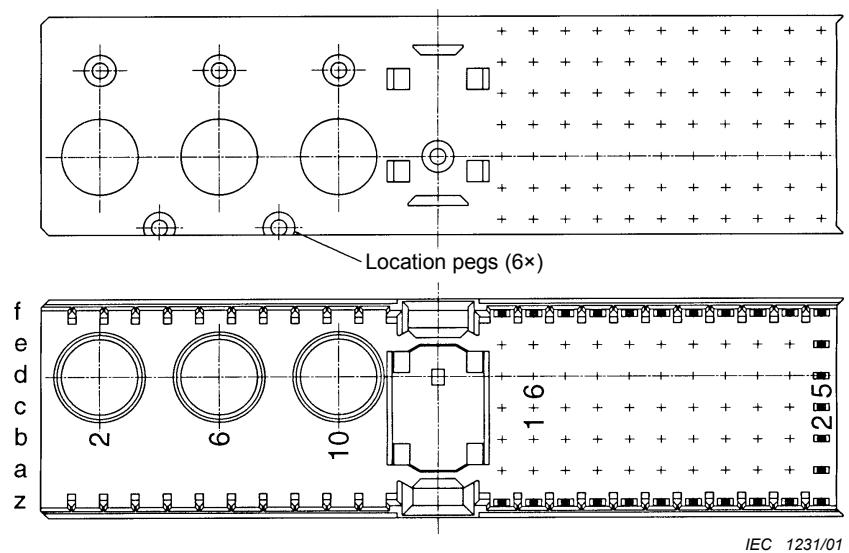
Dimensions of style M, fixed 50 mm mixed module with three special contacts
